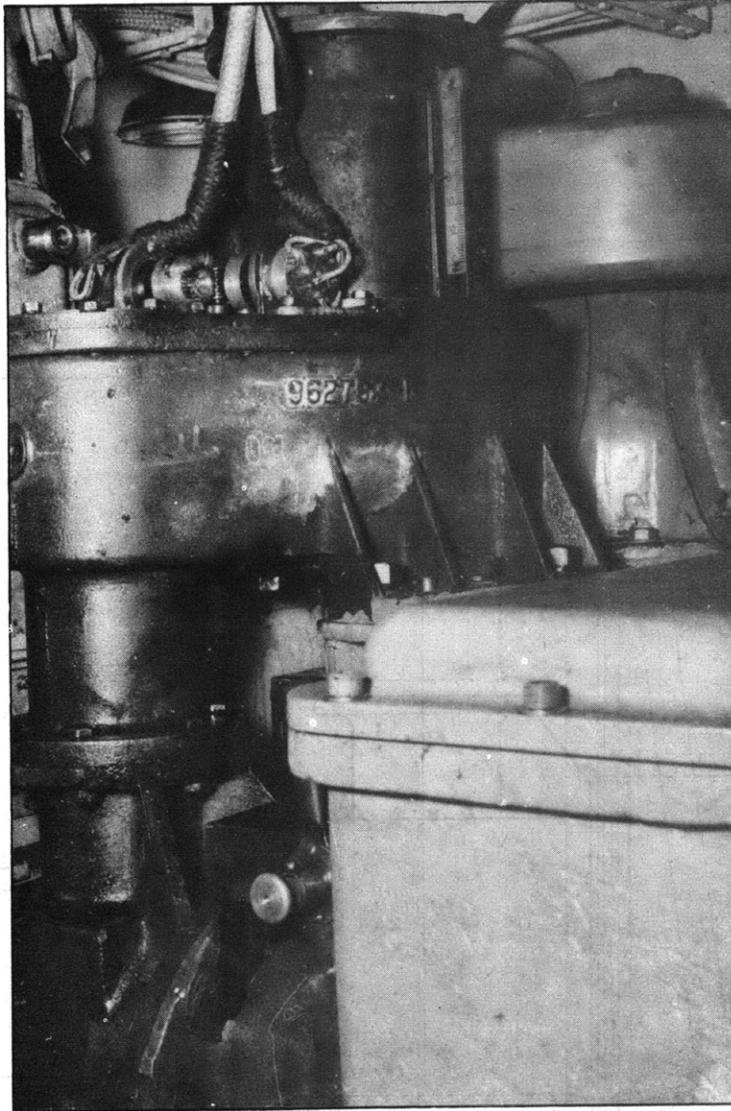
Photograph of the Pitch Control Adapter Assembly
